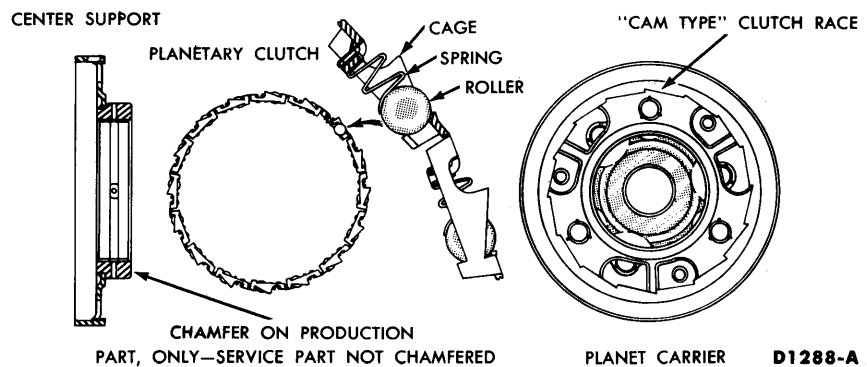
Planetary Clutch, Planet Carrier and Center Support
